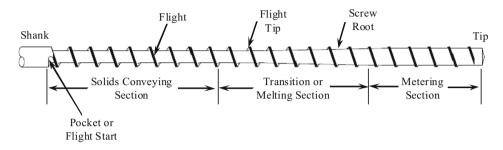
Schematic of a typical single-flighted screw (courtesy of G.A. Campbell and M.A. Spalding, *Analyzing and Troubleshooting Single-Screw Extruders,* 2nd ed., Hanser (2021))
